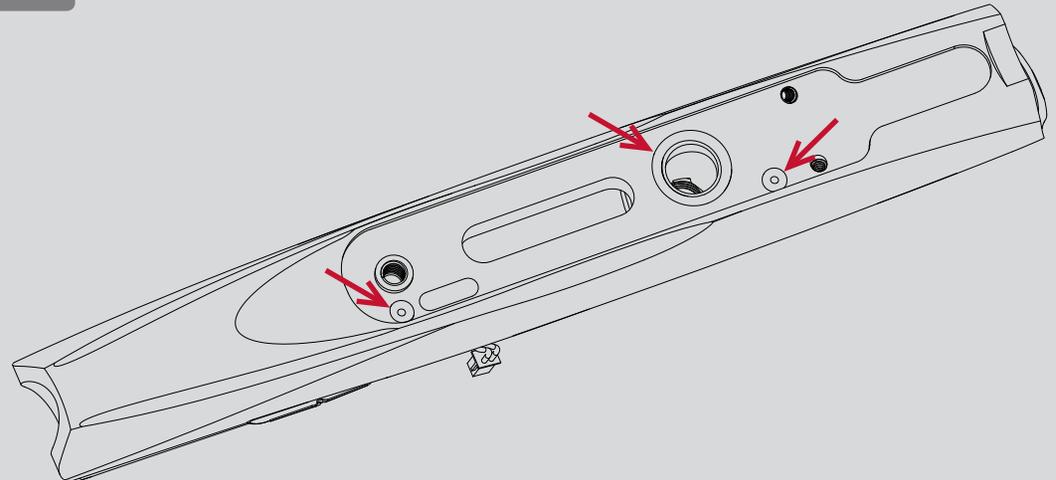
→ BODY O-RING PLACEMENT ON THE LOWER BODY
